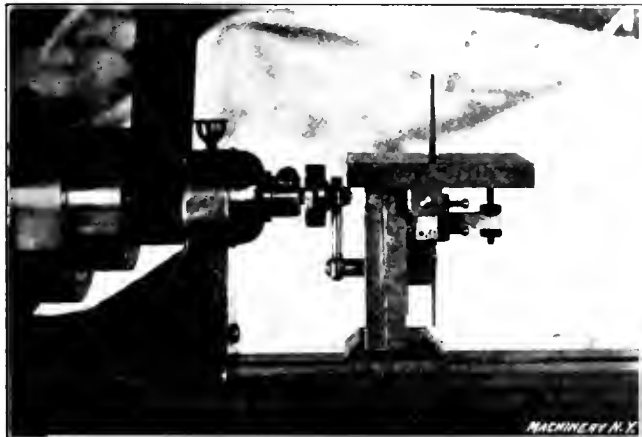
Bench Lathe Filing Attachment for Filing Clearance in the Dies, etc.
